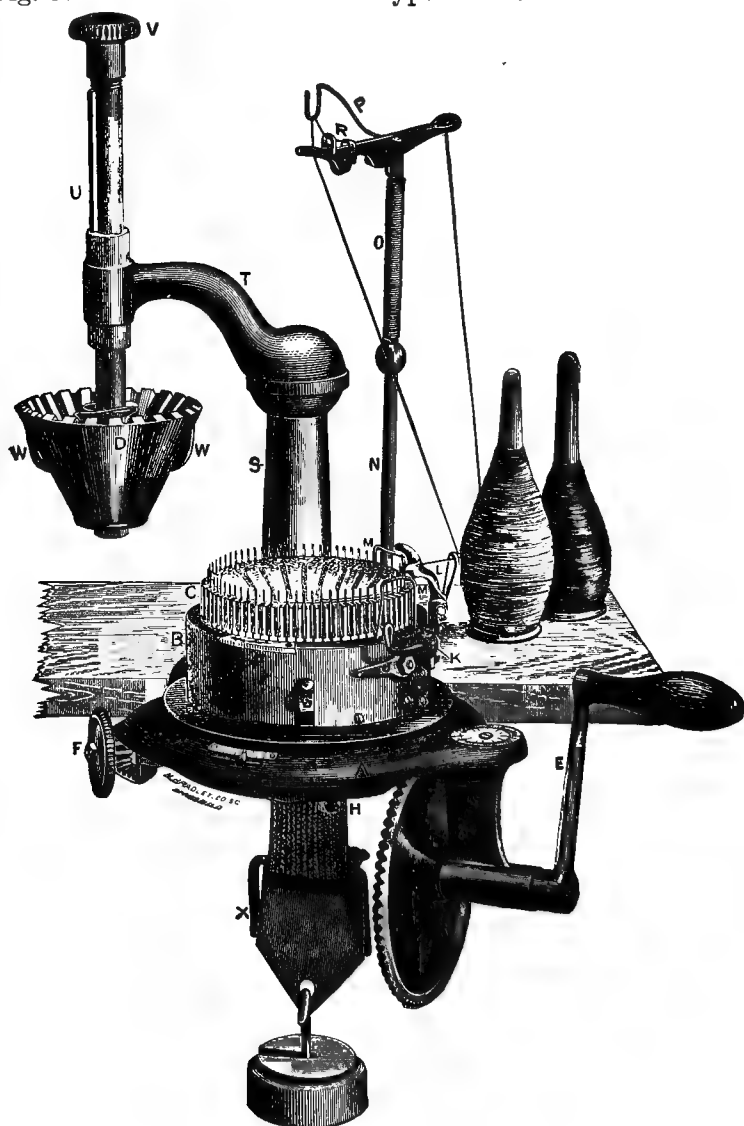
The Tuttle knitting machine. (The Lamb Co.)
